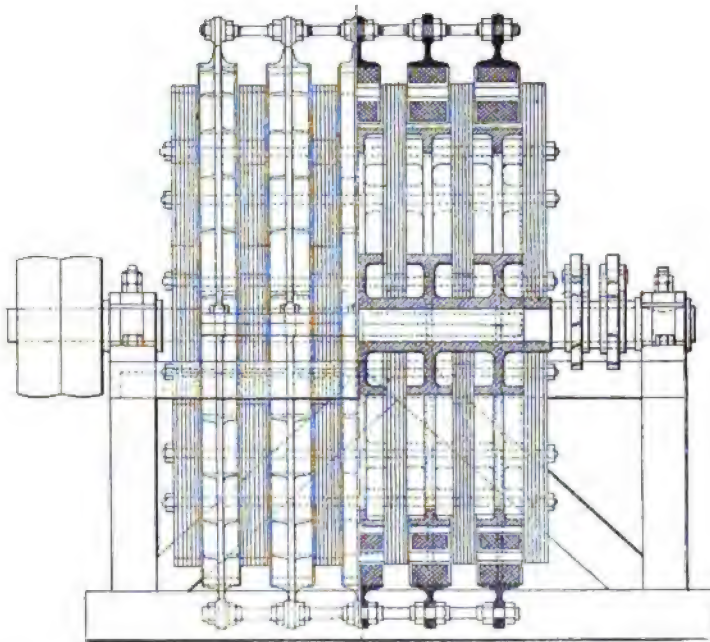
FRONT VIEW AND CROSS SECTION OF THE HOLMES MAGNETO-ELECTRIC MACHINE, WITH PERMANENT MAGNETS.
